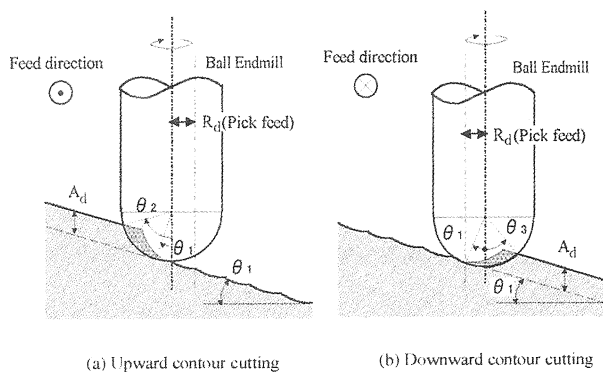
Geometrical relations of nose engagement angle θ on inclined surfaces in pick feed cutting by ball end mill
